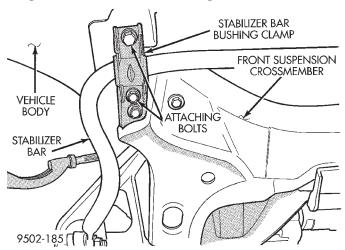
Stabilizer Bar Bushing Retainer Attaching Bolts
